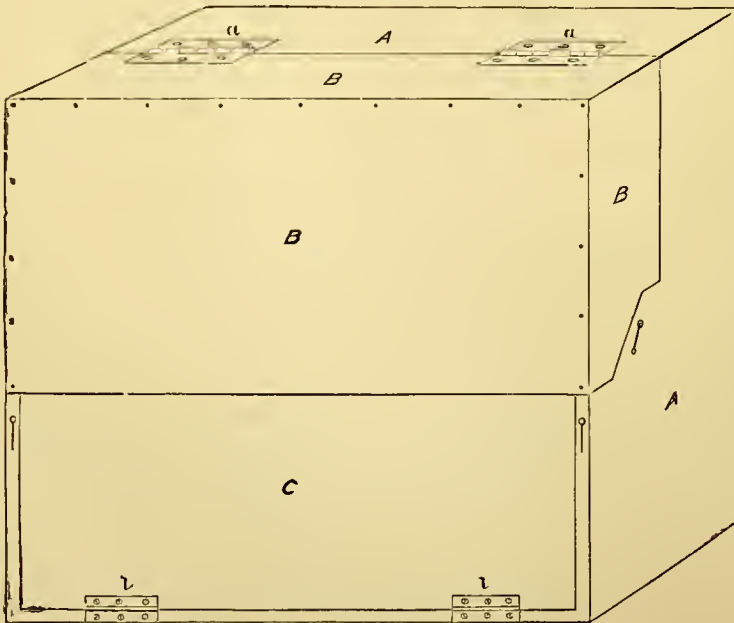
FRONT ELEVATION AND ISOMETRICAL VIEW OF BOOK-CASE WHEN CLOSED. Scale,  $1\frac{1}{2}$  inches to 1 foot.
